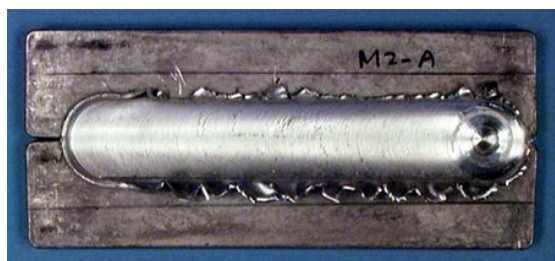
A friction-stir butt weld between two casting plates (450 rpm).
